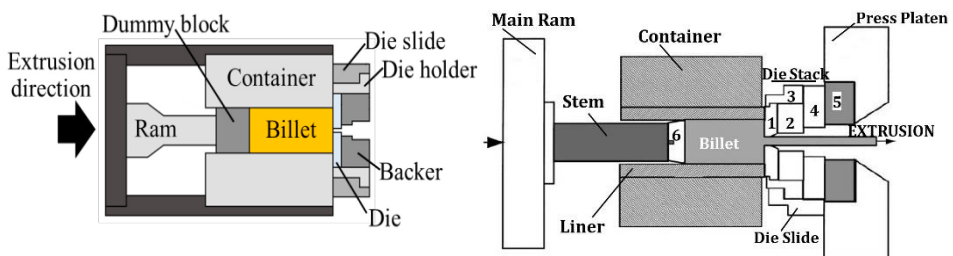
Extrusion tooling used in hot extrusion. [10, 15], 1, solid die; 2, backer; 3, die holder ; 4, bolster; 5, pressure pad; and 6, dummy block
